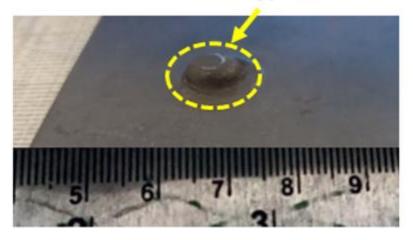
Pre deformed upper Mild steel sheet using Clinching machine.
